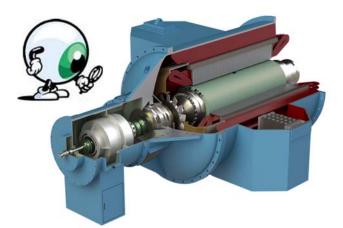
Visual inspection with the trained eye and electrical testing is important parts of the Major Overhaul
